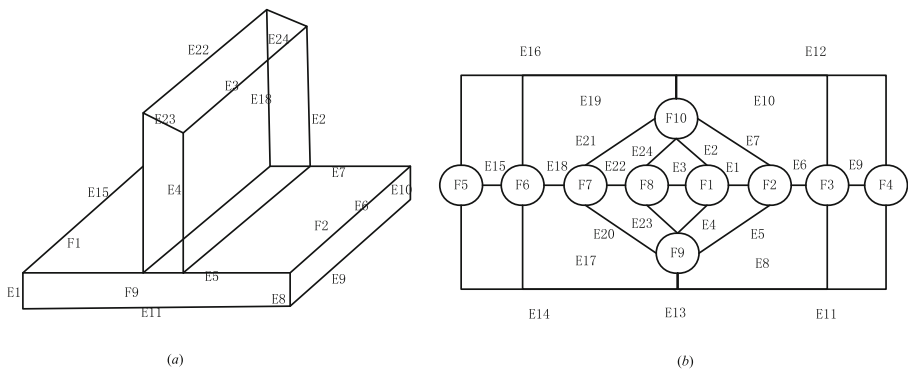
Schematic diagram of assembly of T-shaped three-dimensional mechanical components
